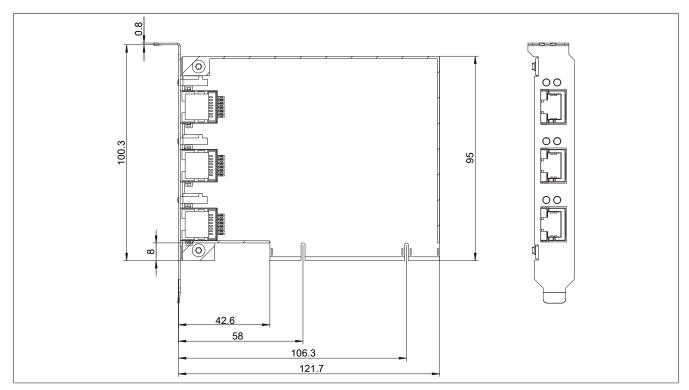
5ACPCI.ETH3-01 - Dimensions
